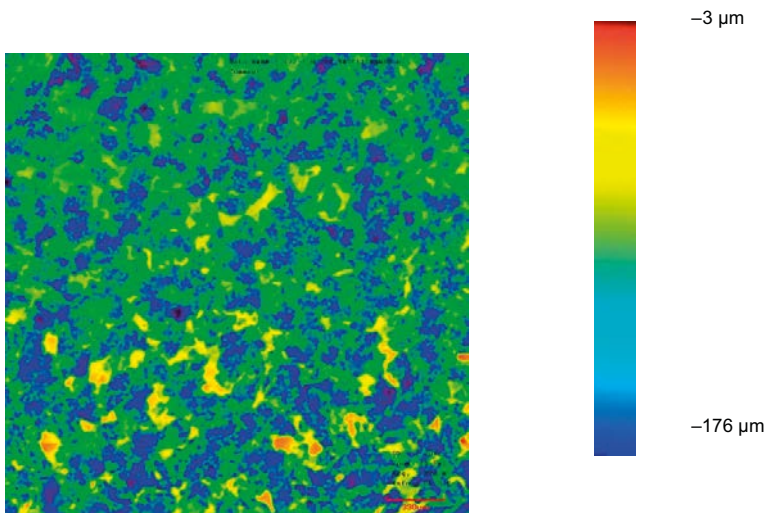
Weld (retreating) on copper material 172/1. The imaged size is 2.6×2.6 mm.
